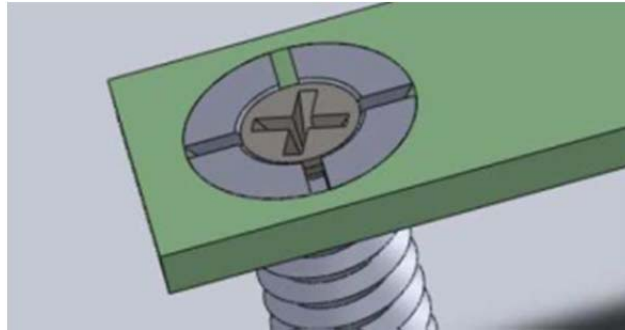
Assembled 2011 Anti-Wobble Design (Brunelli et al, 2011)
